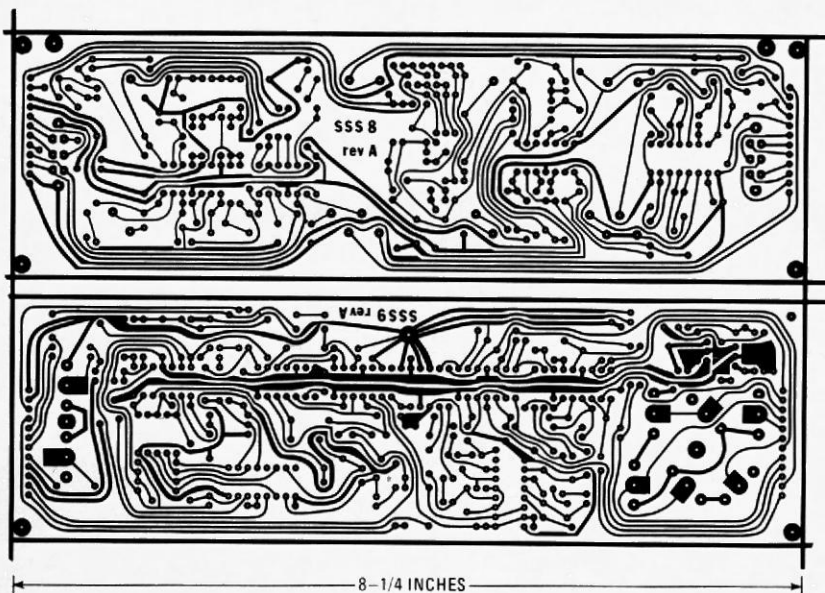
FOIL PATTERN for the front and rear PC boards. Both patterns can be etched on a single copper-clad board (as shown) if you wish.
